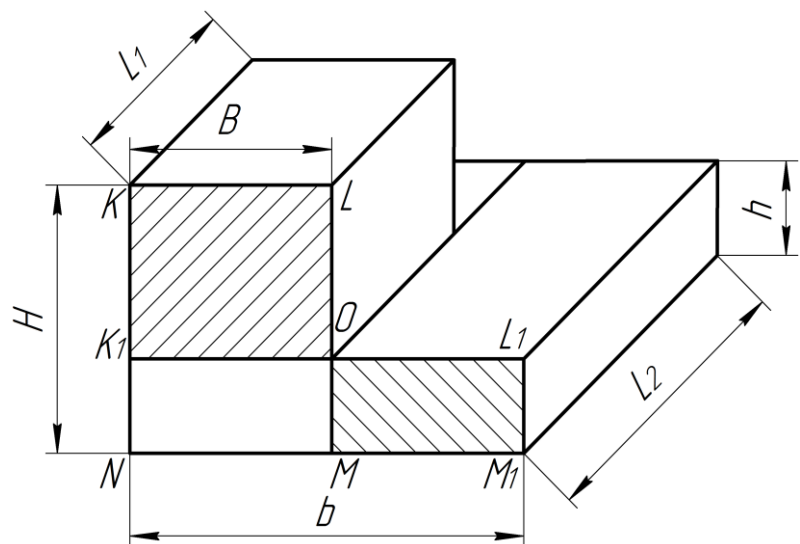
Changing of geometric parameters of the workpiece during drawing out
